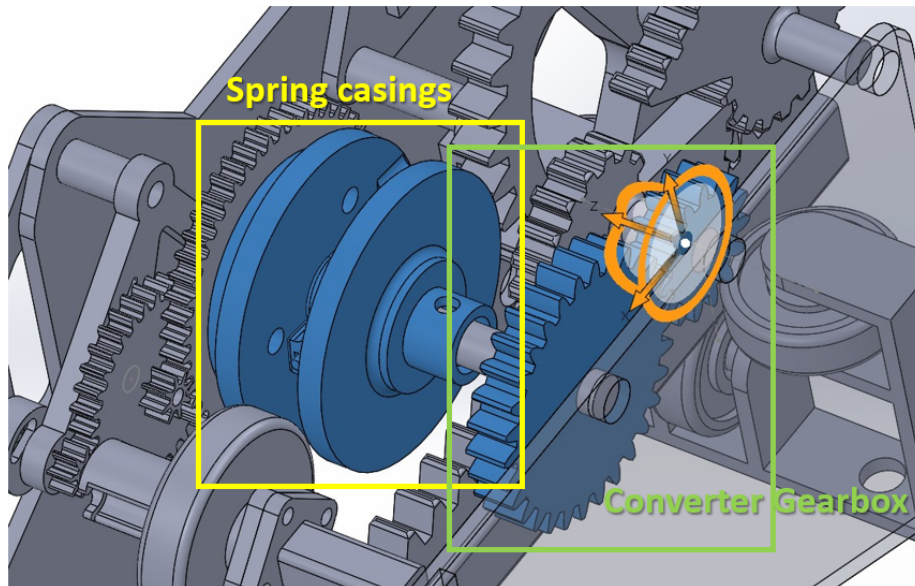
The spring casing (spring not shown) and the converter gearbox transmitting torque and rotation between the spring and the CVT gerset.
